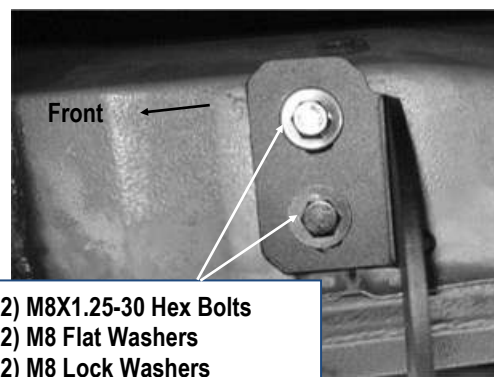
Passenger Center Mounting Bracket (PCM/PRM) Installed
